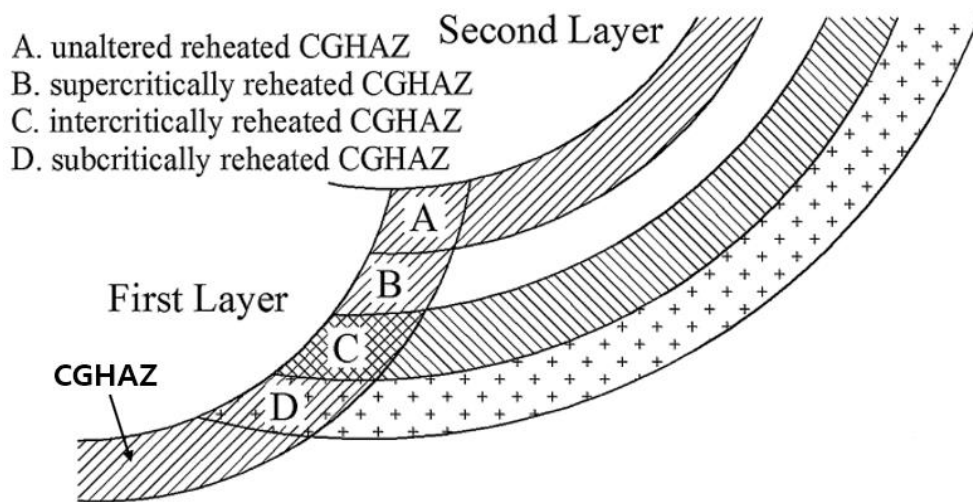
Schematic diagram showing HAZ formed when multi-pass welding[27]
